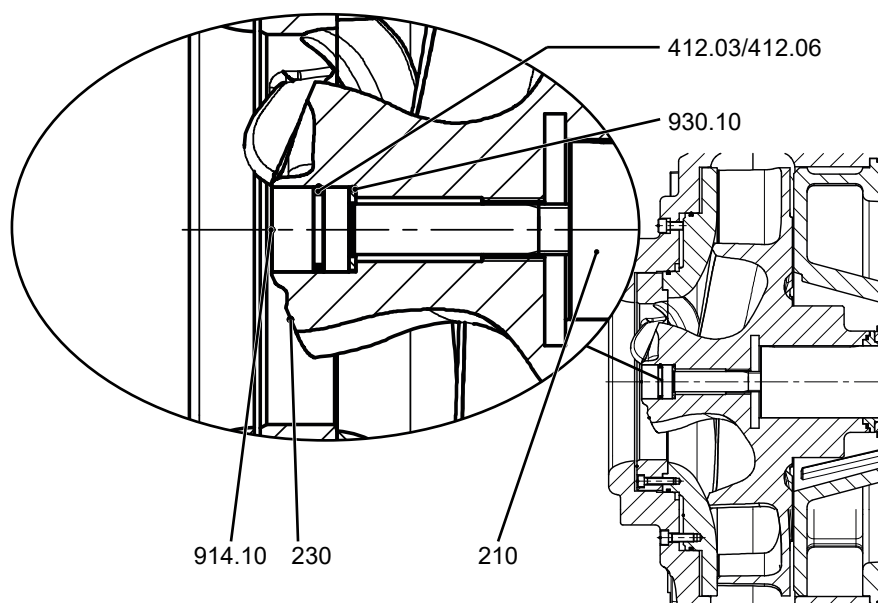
Removing D impeller with cylindrical fit from pump with bearing bracket S07
